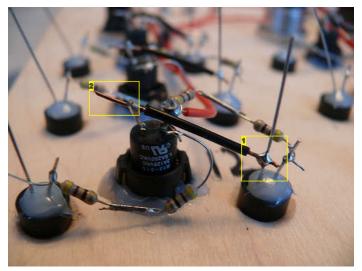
soldered with extra cut off2. leave extra wire on this side
